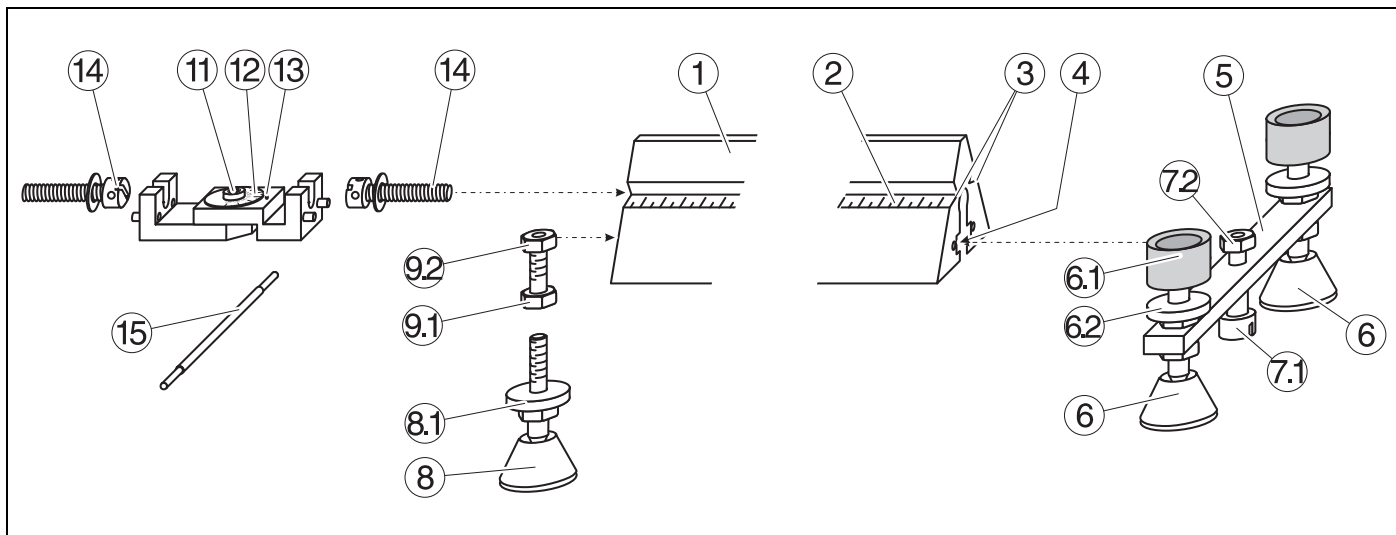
Auxiliary bench with swivel joint and protractor (460 34)
